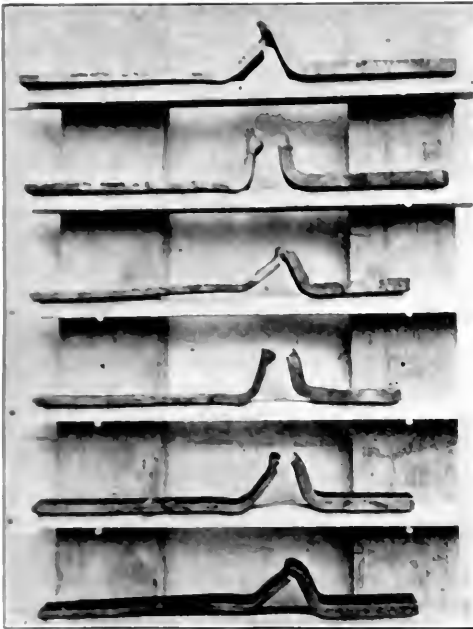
SPECIMENS OF TYPE A, WELDED
